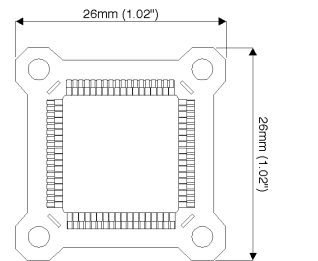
100 pin QFP Socket Adapter Dimensions for HP E3471D (HP P/N E3471-61622)
